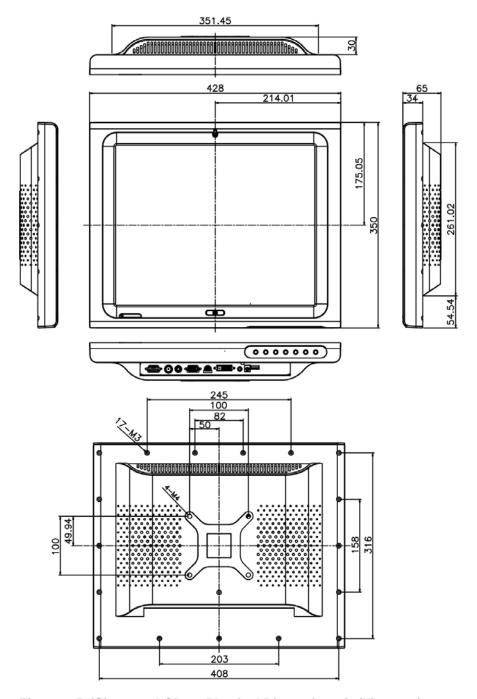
iSignager LCD-17 Physical Dimensions (millimeters)
